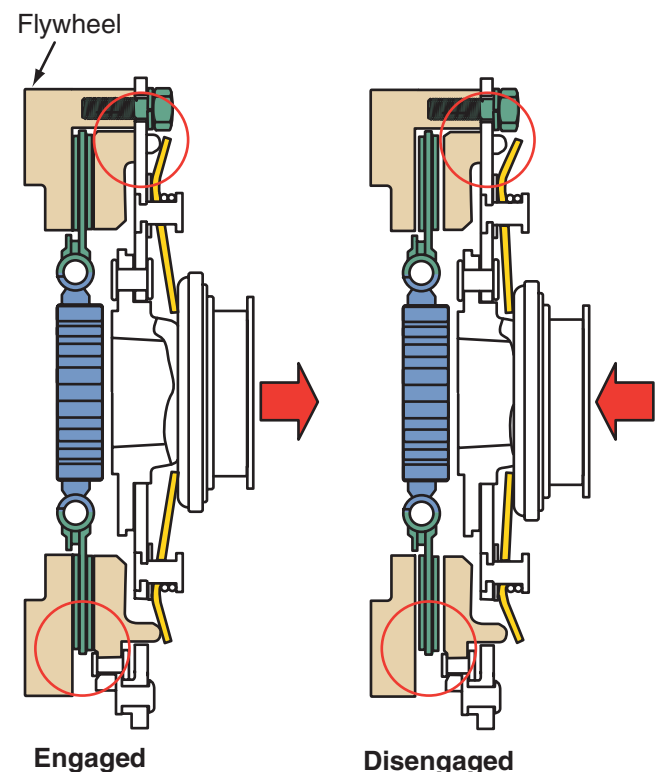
The action of a diaphragm spring-type pressure plate assembly.
